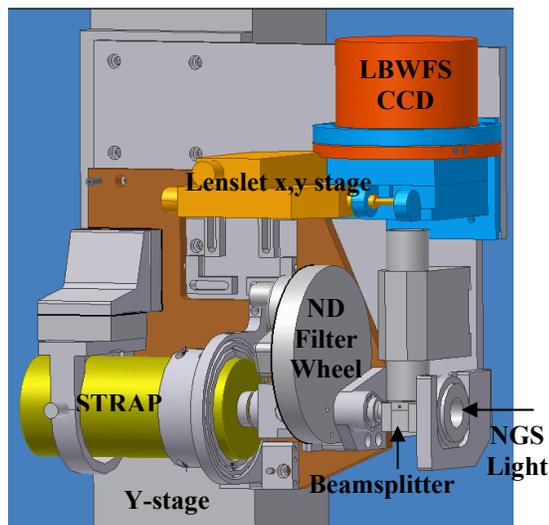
CAD drawing of the STRAP tip/tilt sensor and LBWFS sensor.
